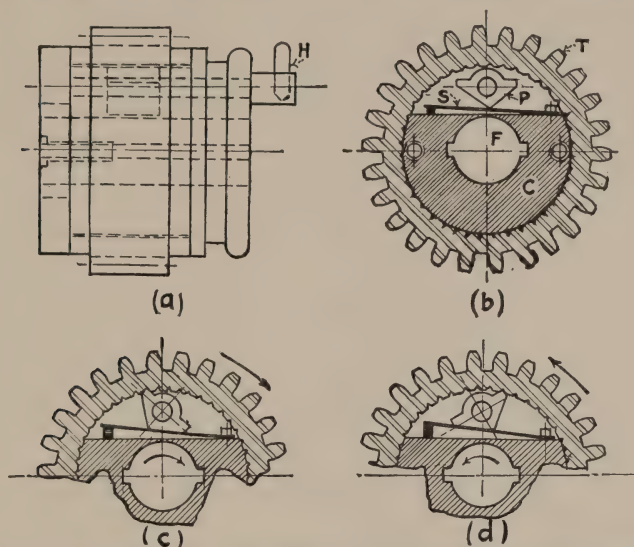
Inclosed type of feed gear, ratchet and pawl, or "trigger gear." The pawl carrier C is a bushing fitting over the feed screw F or the feed rod as the case may be, and fitting freely within a fairly large hole in the gear T . A portion of the bushing is cut out to receive the trigger type of pawl P and the flat spring S that holds it in place. Notches are cut lengthwise through the hole in the gear to form the ratchet teeth. The handle H serves to change the trigger to any one of three positions as shown in (b), (c), and (d).
